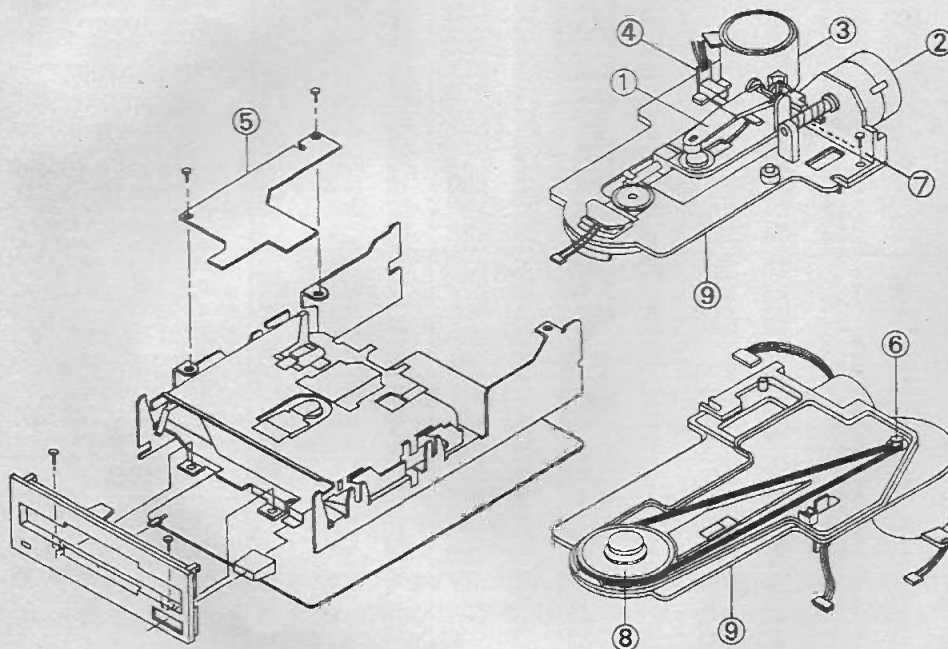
The disc drive mechanism used in Amstrad PCW series word-processors. 1 Head bracket assembly; 2 stepper motor; 3 spindle motor; 4 track 00 sensor; 5 read/write protect, index, LED PCB; 6 pulley; 7 stepper motor shaft; 8 flywheel; 9 loading unit.
